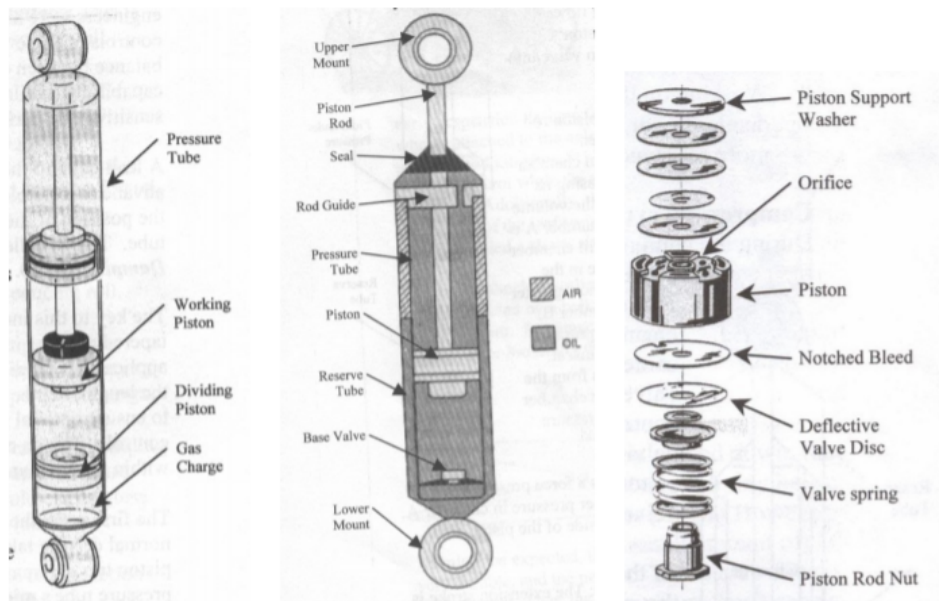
From left to right: Mono tube, twin tube and typical valve construction [2]
